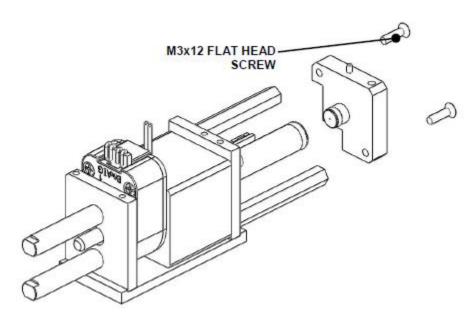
Removing the Syringe Manifold from the Dispense Tube
